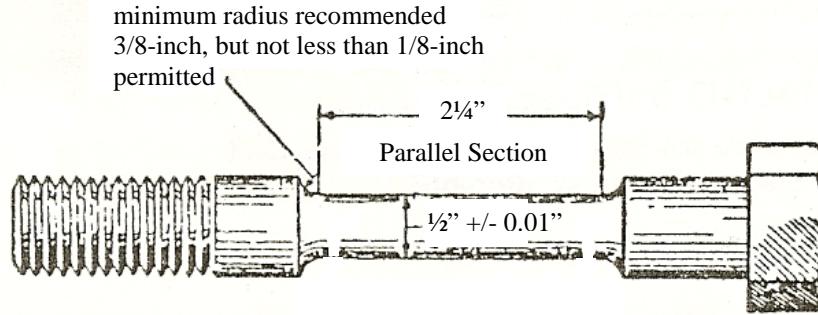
Tension Test Specimen for Bolts with Turned-Down Shank (ASTM F606-05)
